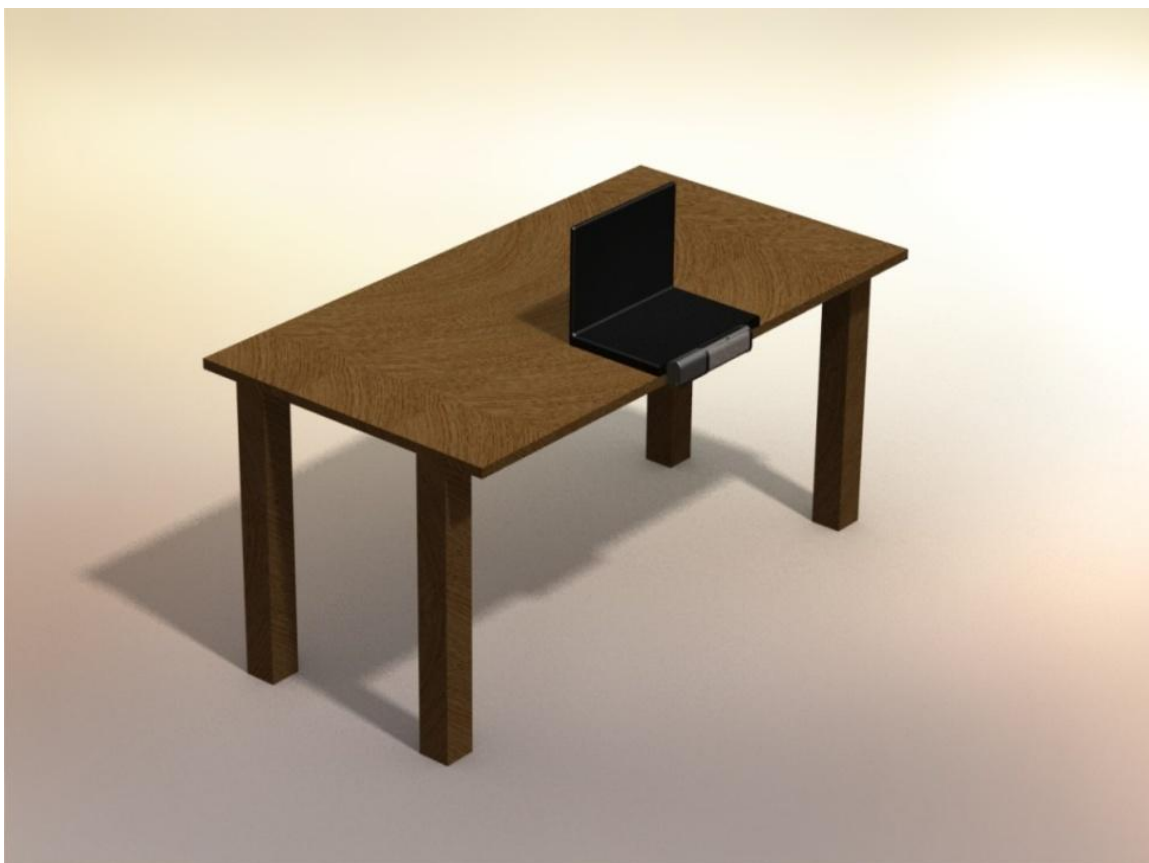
CAD model of PAV-4 prototype mounted on the front of a desk.
